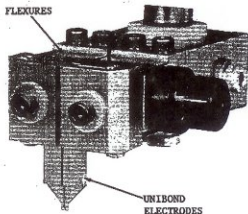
Close-up of the Model HE50UB Unibond Electrode Holder with Unibond Electrodes.
